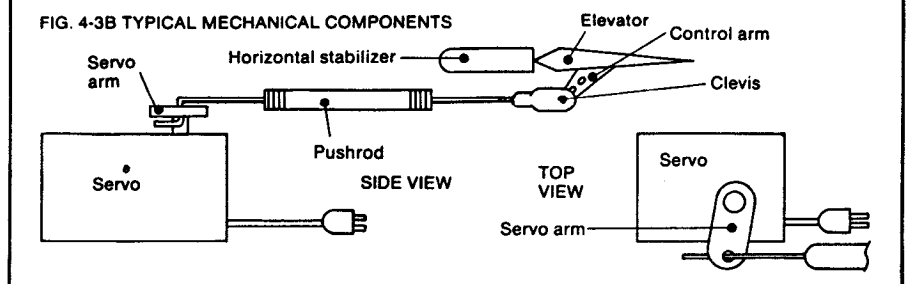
B TYPICAL MECHANICAL COMPONENTS
